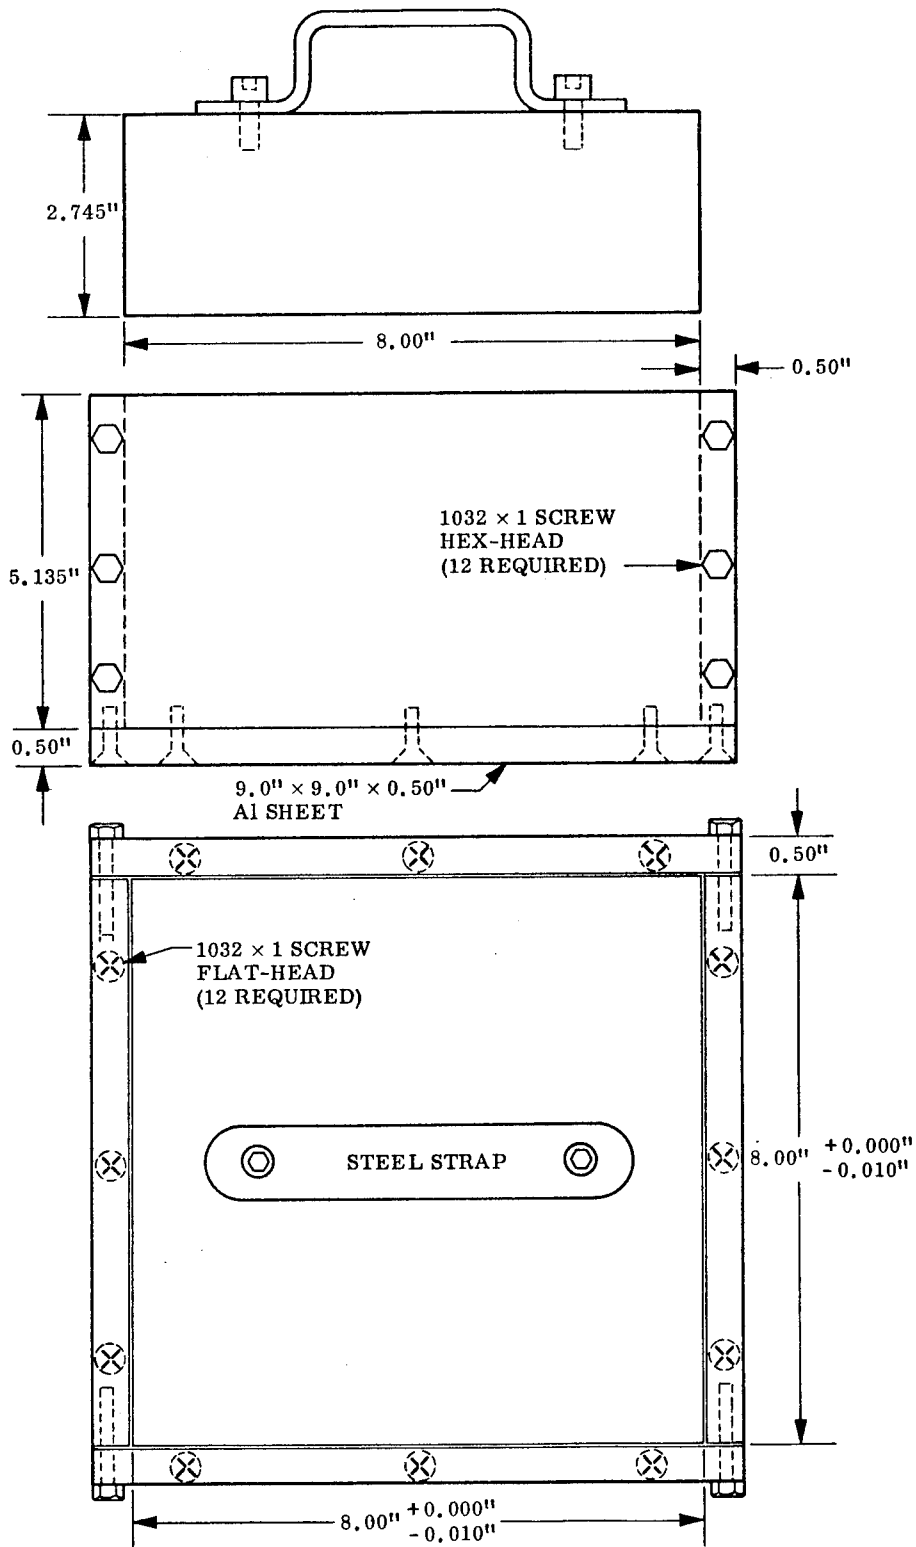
2-inch PBI-Carbon Composite Billet Preform Mold (Aluminum)
